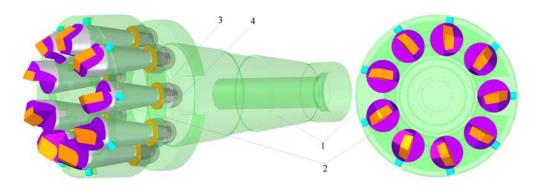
3D model of the Romascon milling head with the axes of the looks parallel to the body axis
